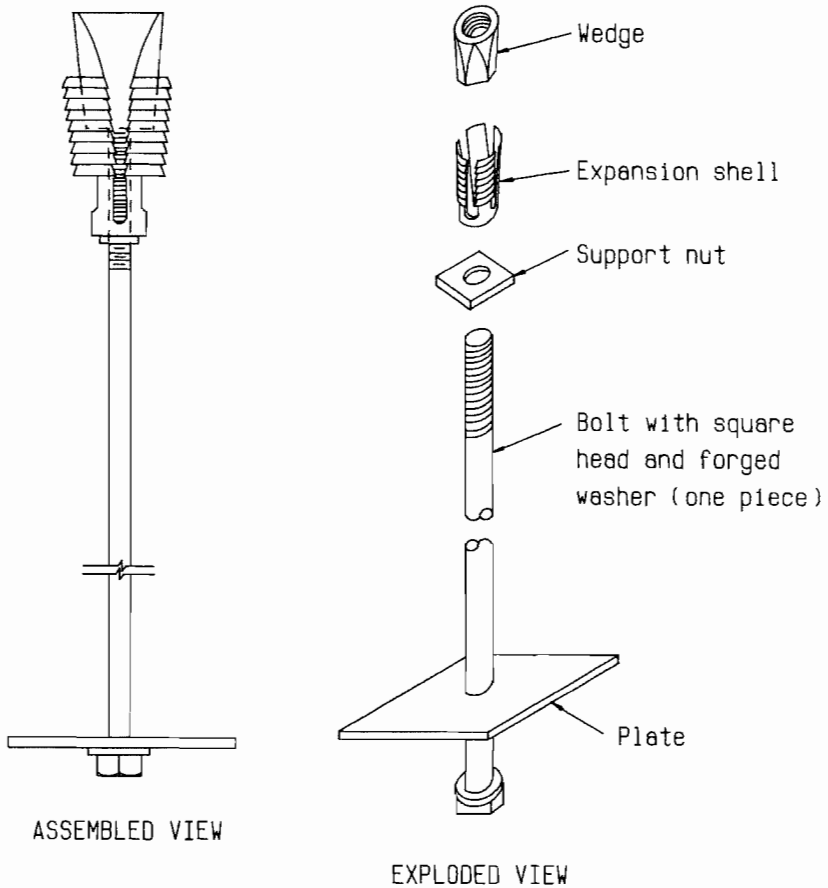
Regular Expansion Anchorage--Headed Bolt (U.S. Army, 1980).
